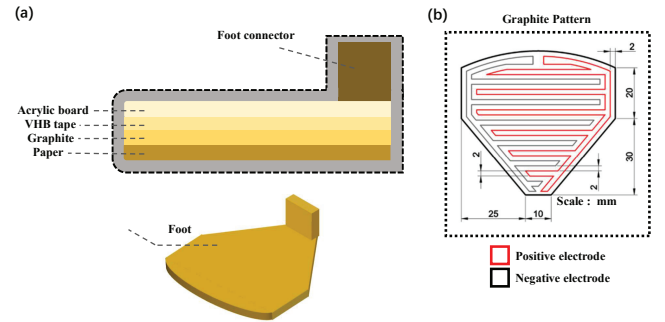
Schematic of the robot foot. (a) exploded view, (b) dimensions of the electrode pattern.
